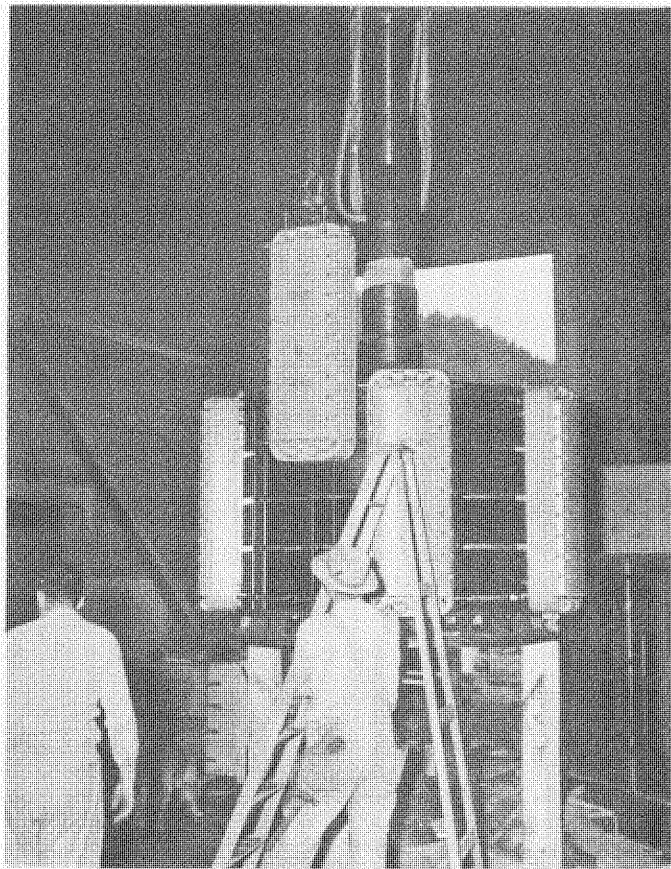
View of rotor for unit 1 during assembly, showing one of the poles being lowered into place. P783-908-1683, August 18, 1954.
